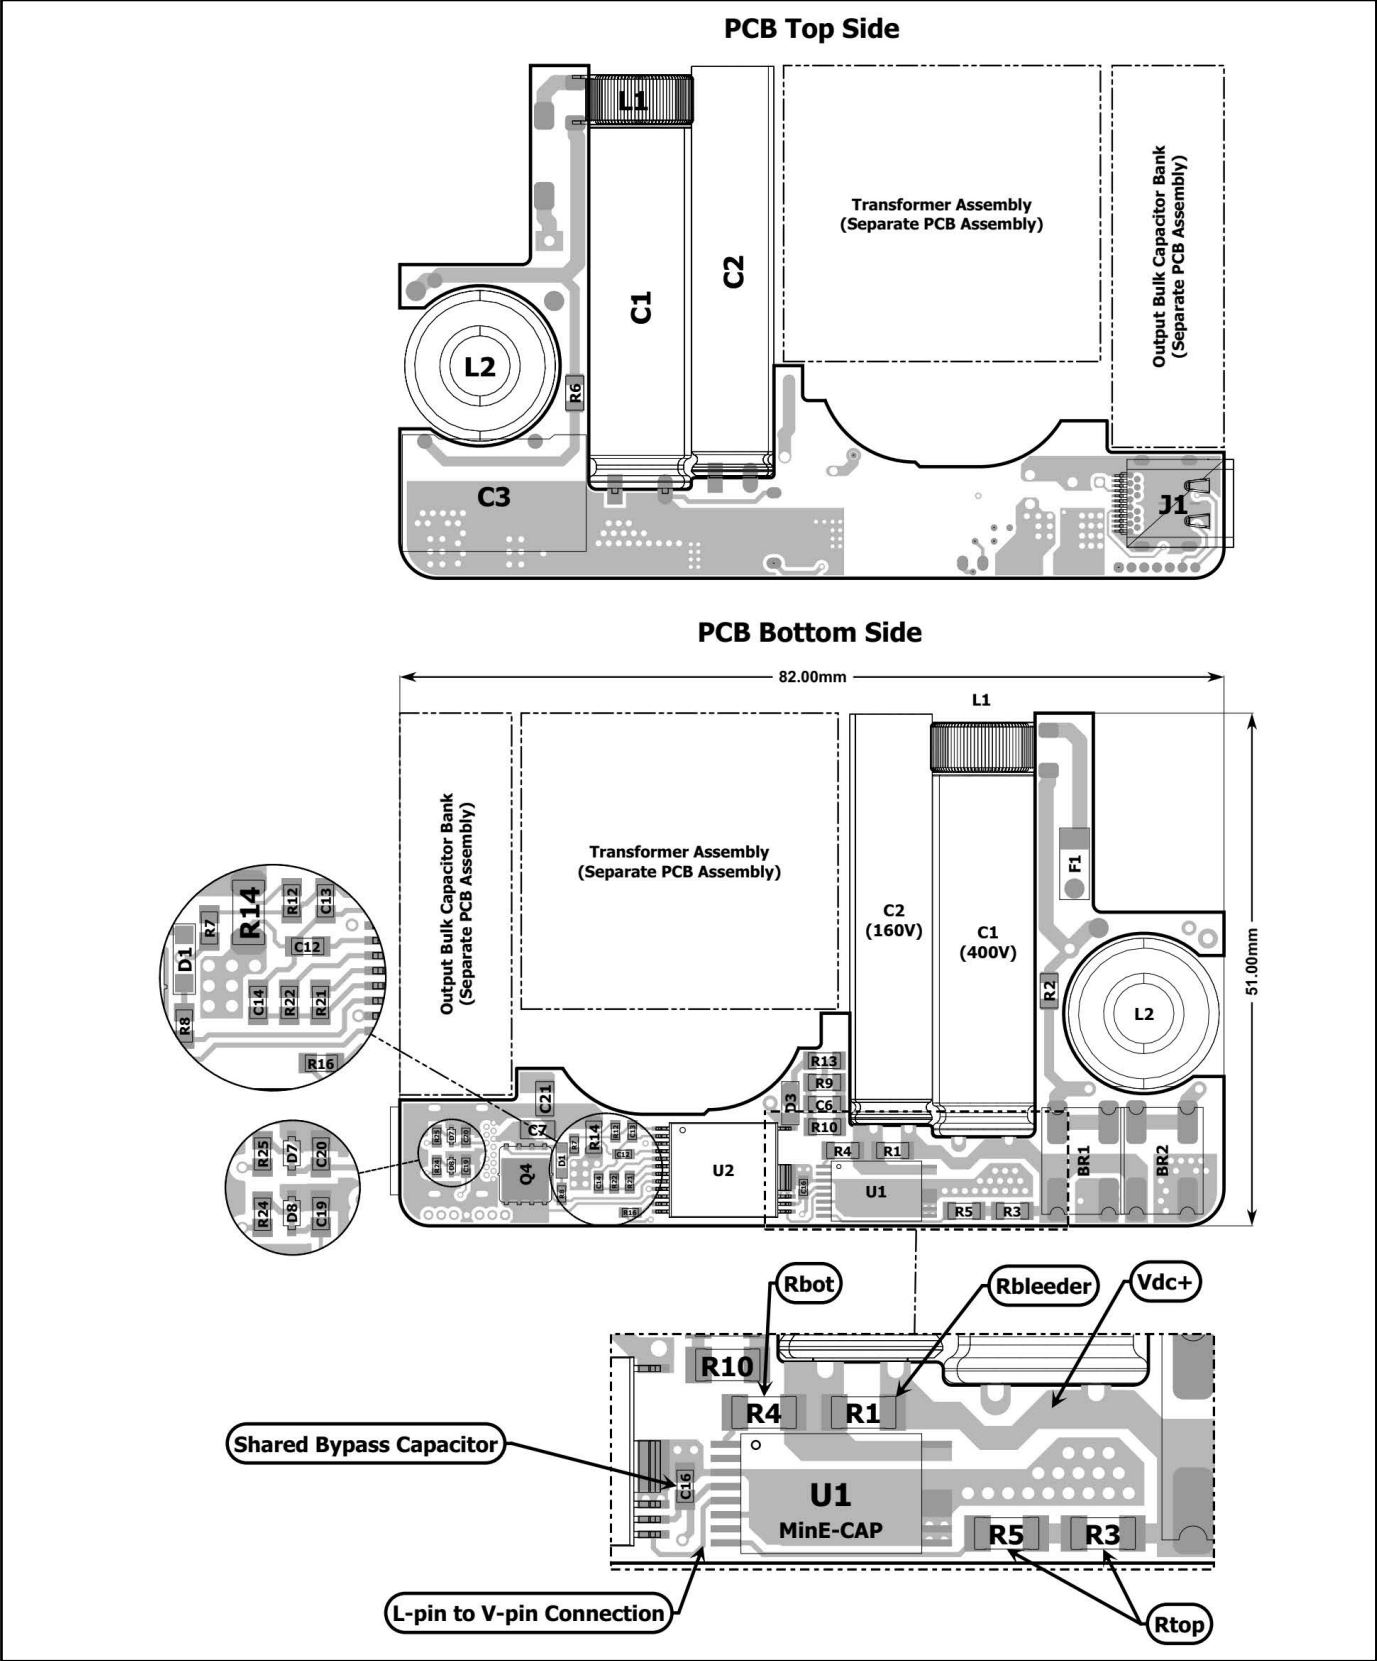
Layout of the Design in Figure 8 Showing the Location of Major Components.
